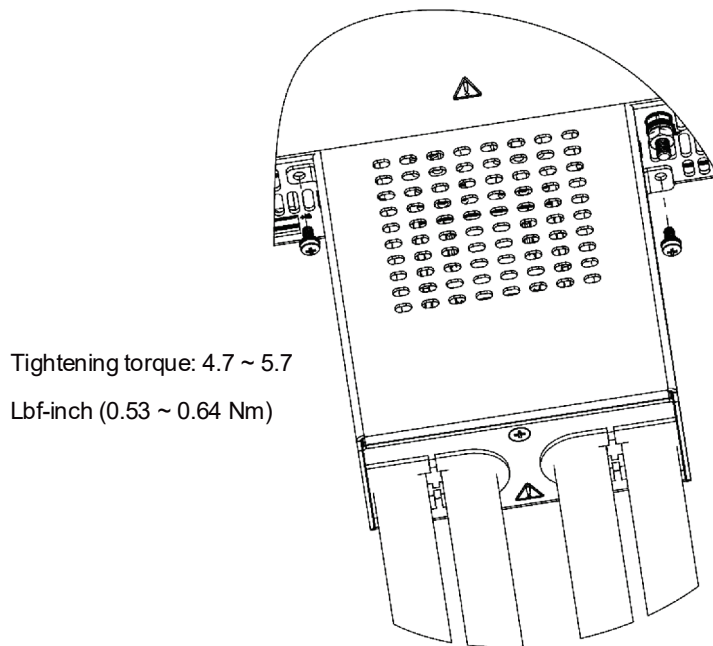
Fixing Bus Bars Protection Assembly to the Rear Panel
